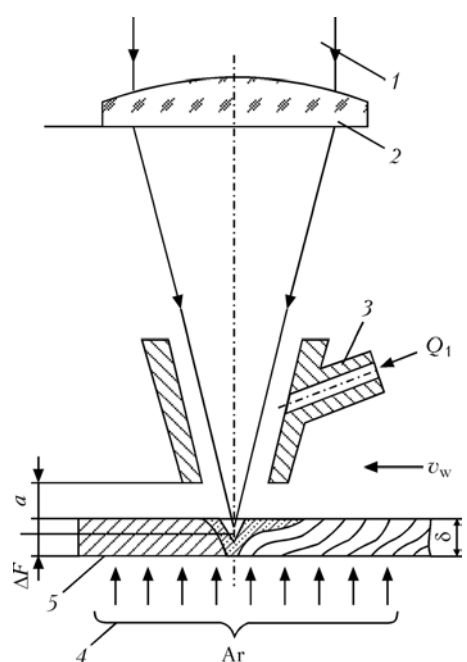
Scheme of laser welding with coaxial shielding gas feeding (see Figure 1 for designations 1–5 here and in Figure 3)
